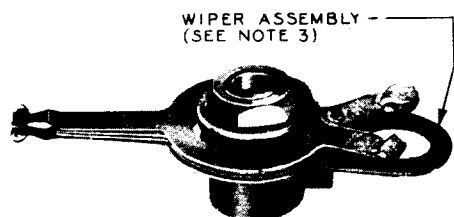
Sleeve Cutoff Jack and Terminal Assembly
